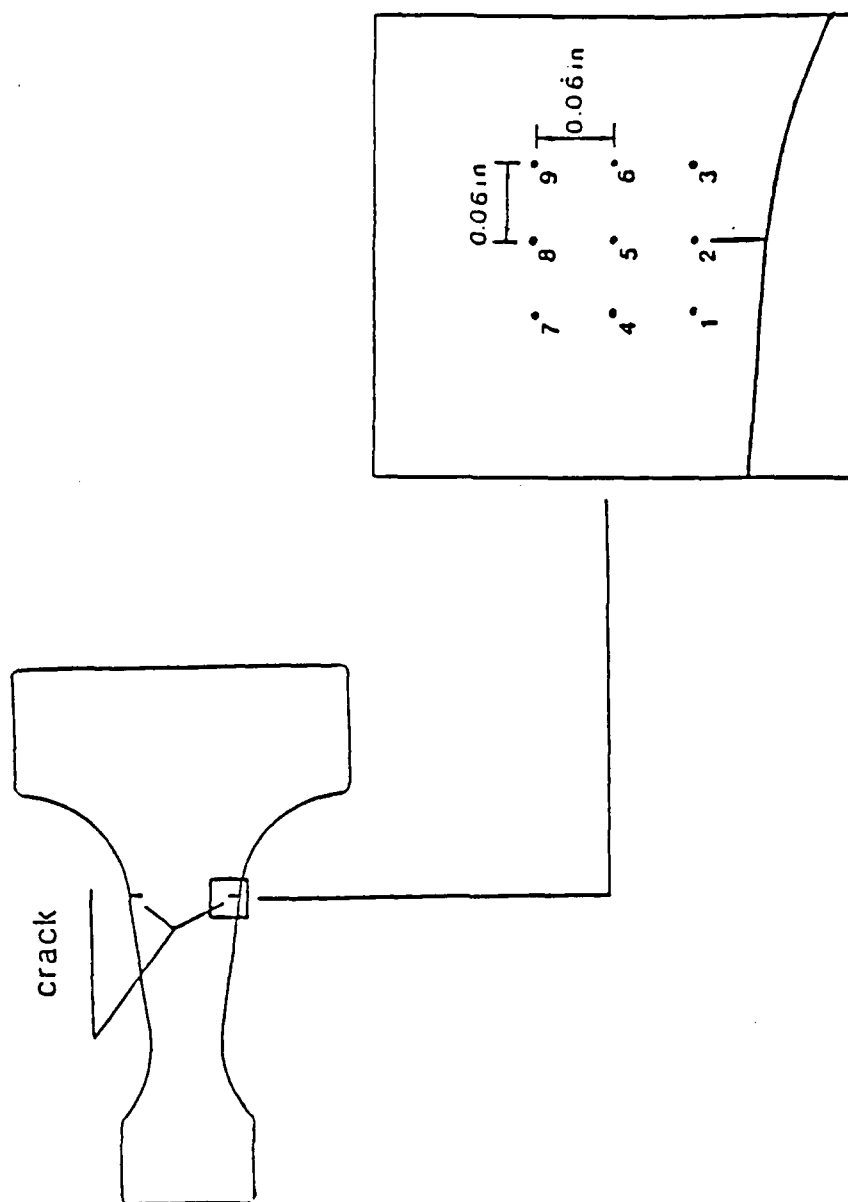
Fatigue specimen with cracks and the 9 test points are arranged around the tip of a crack.
